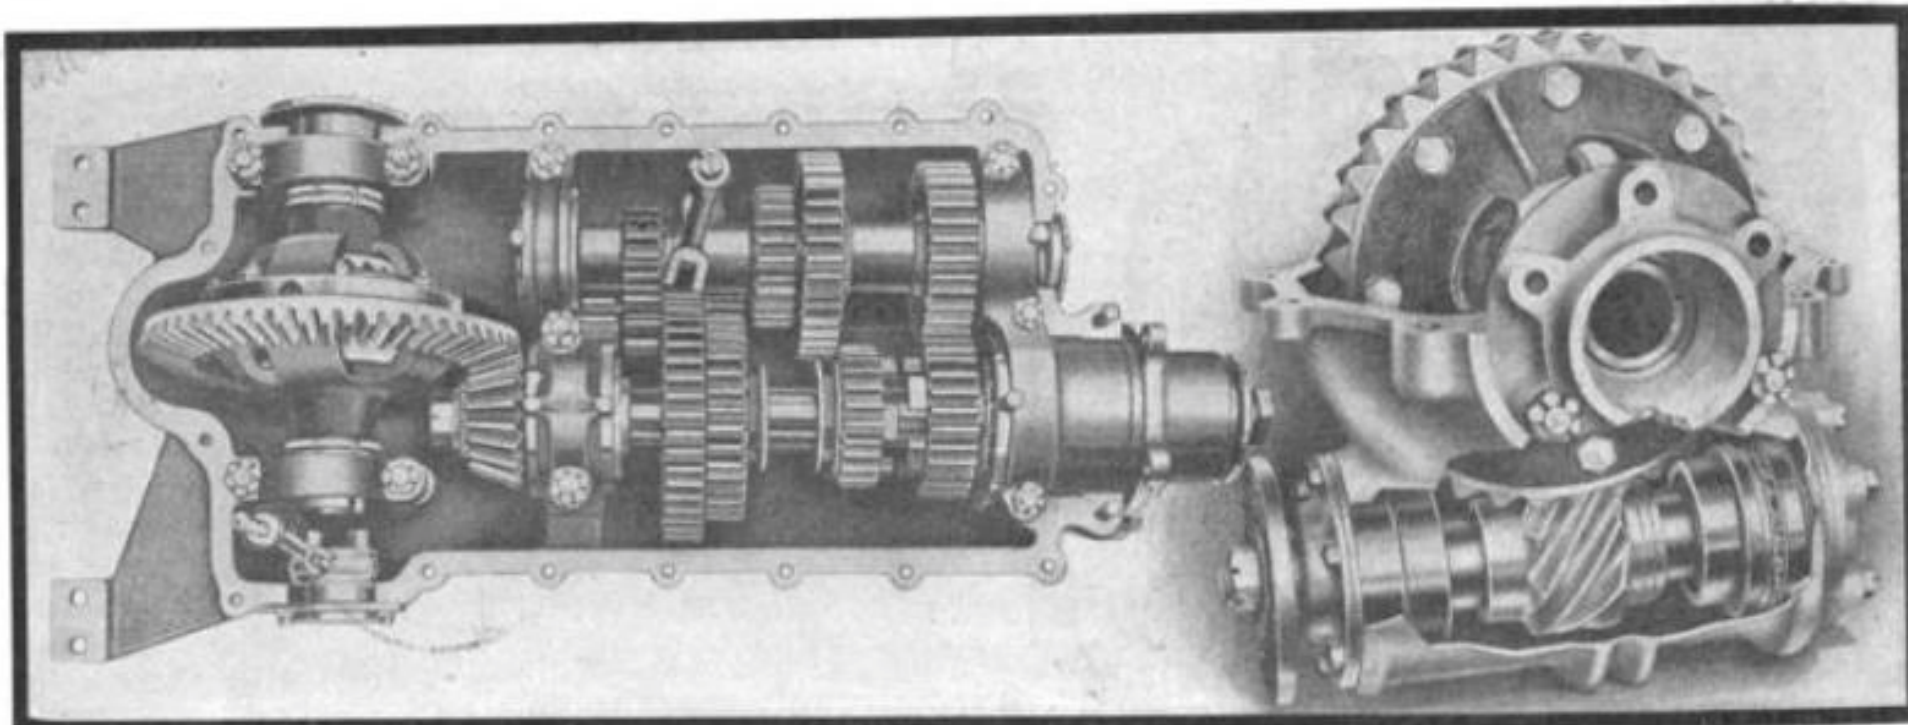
WARNER GEAR CO.'S NEW COMMERCIAL VEHICLE GEARSET AND LANCHESTER WORM-DRIVE DIFFERENTIAL UNIT
